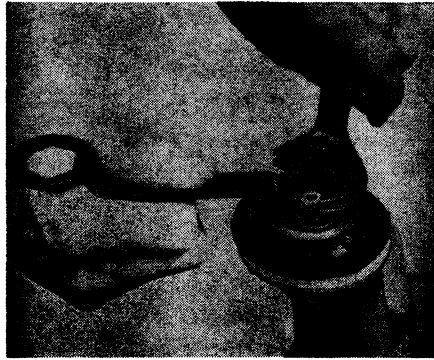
Series B. Holding alignment washer with special wrench while tightening pull rod nut
